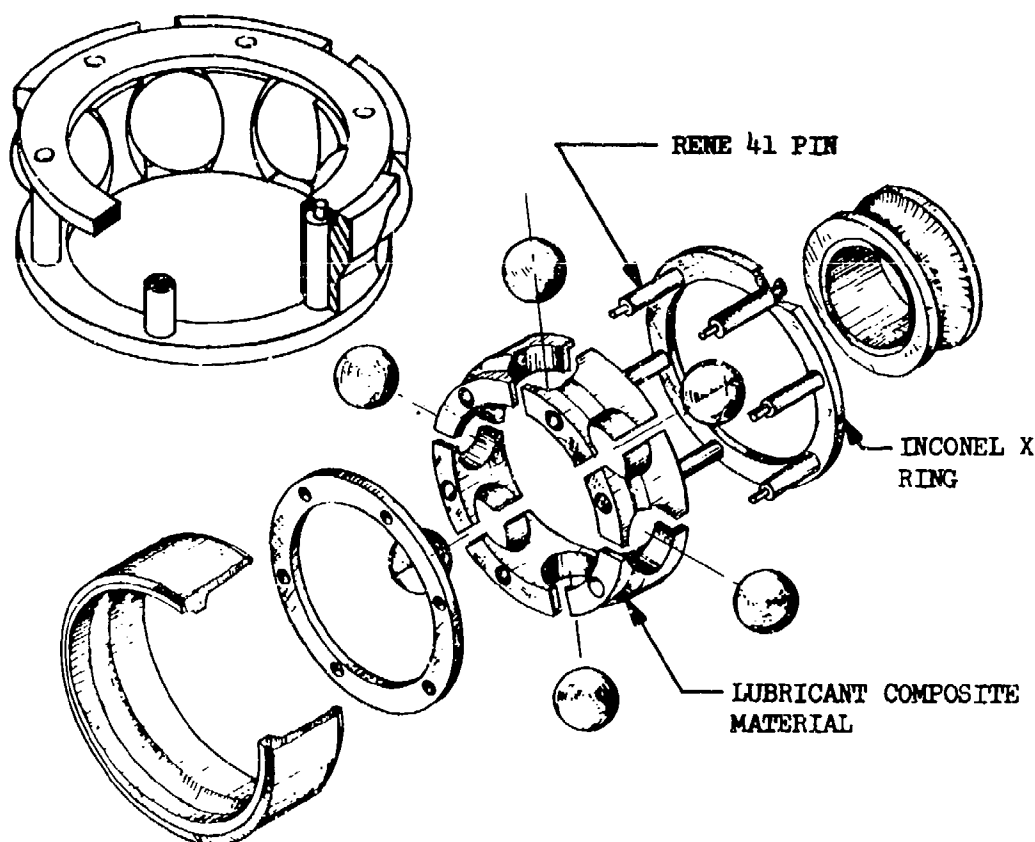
BALL BEARING LUBRICANT COMPOSITE SEPARATOR
